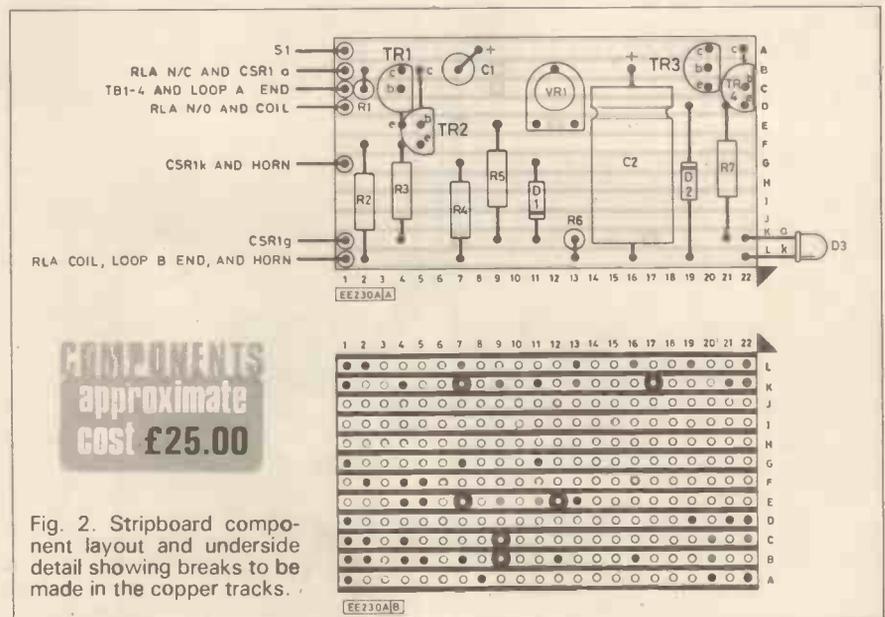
Stripboard component layout and underside detail showing breaks to be made in the copper tracks.
